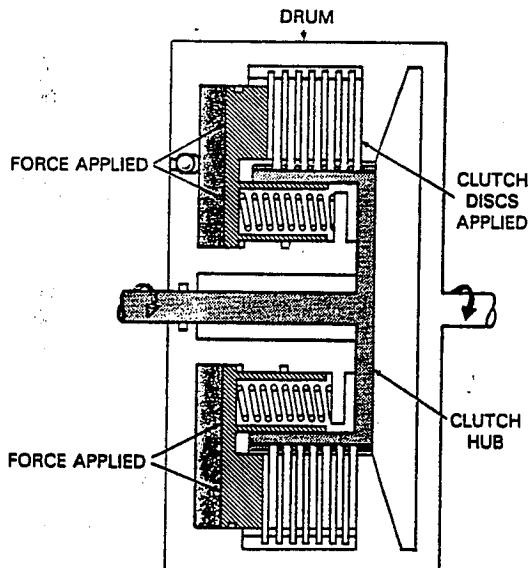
Multiple disc clutch. Oil pressure is now acting against clutch apply piston. Piston overcomes spring pressure and squeezes clutch discs and plates tightly together. In that some discs are attached to drum output shaft assembly and others to hub (in an alternating arrangement), squeezing action locks hub and drum together. Hub now turns output shaft. (GM)
